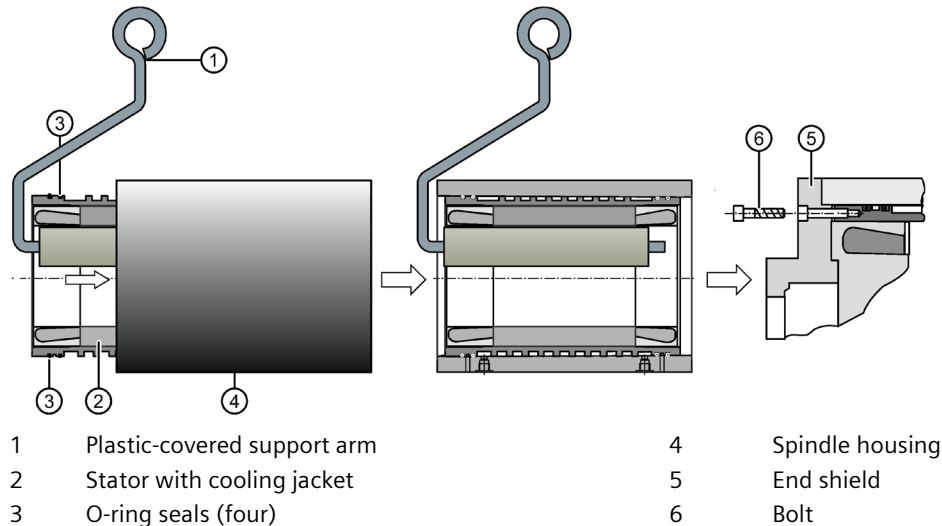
Horizontal mounting of the stator in the spindle housing, steps 3, 4 and 7
